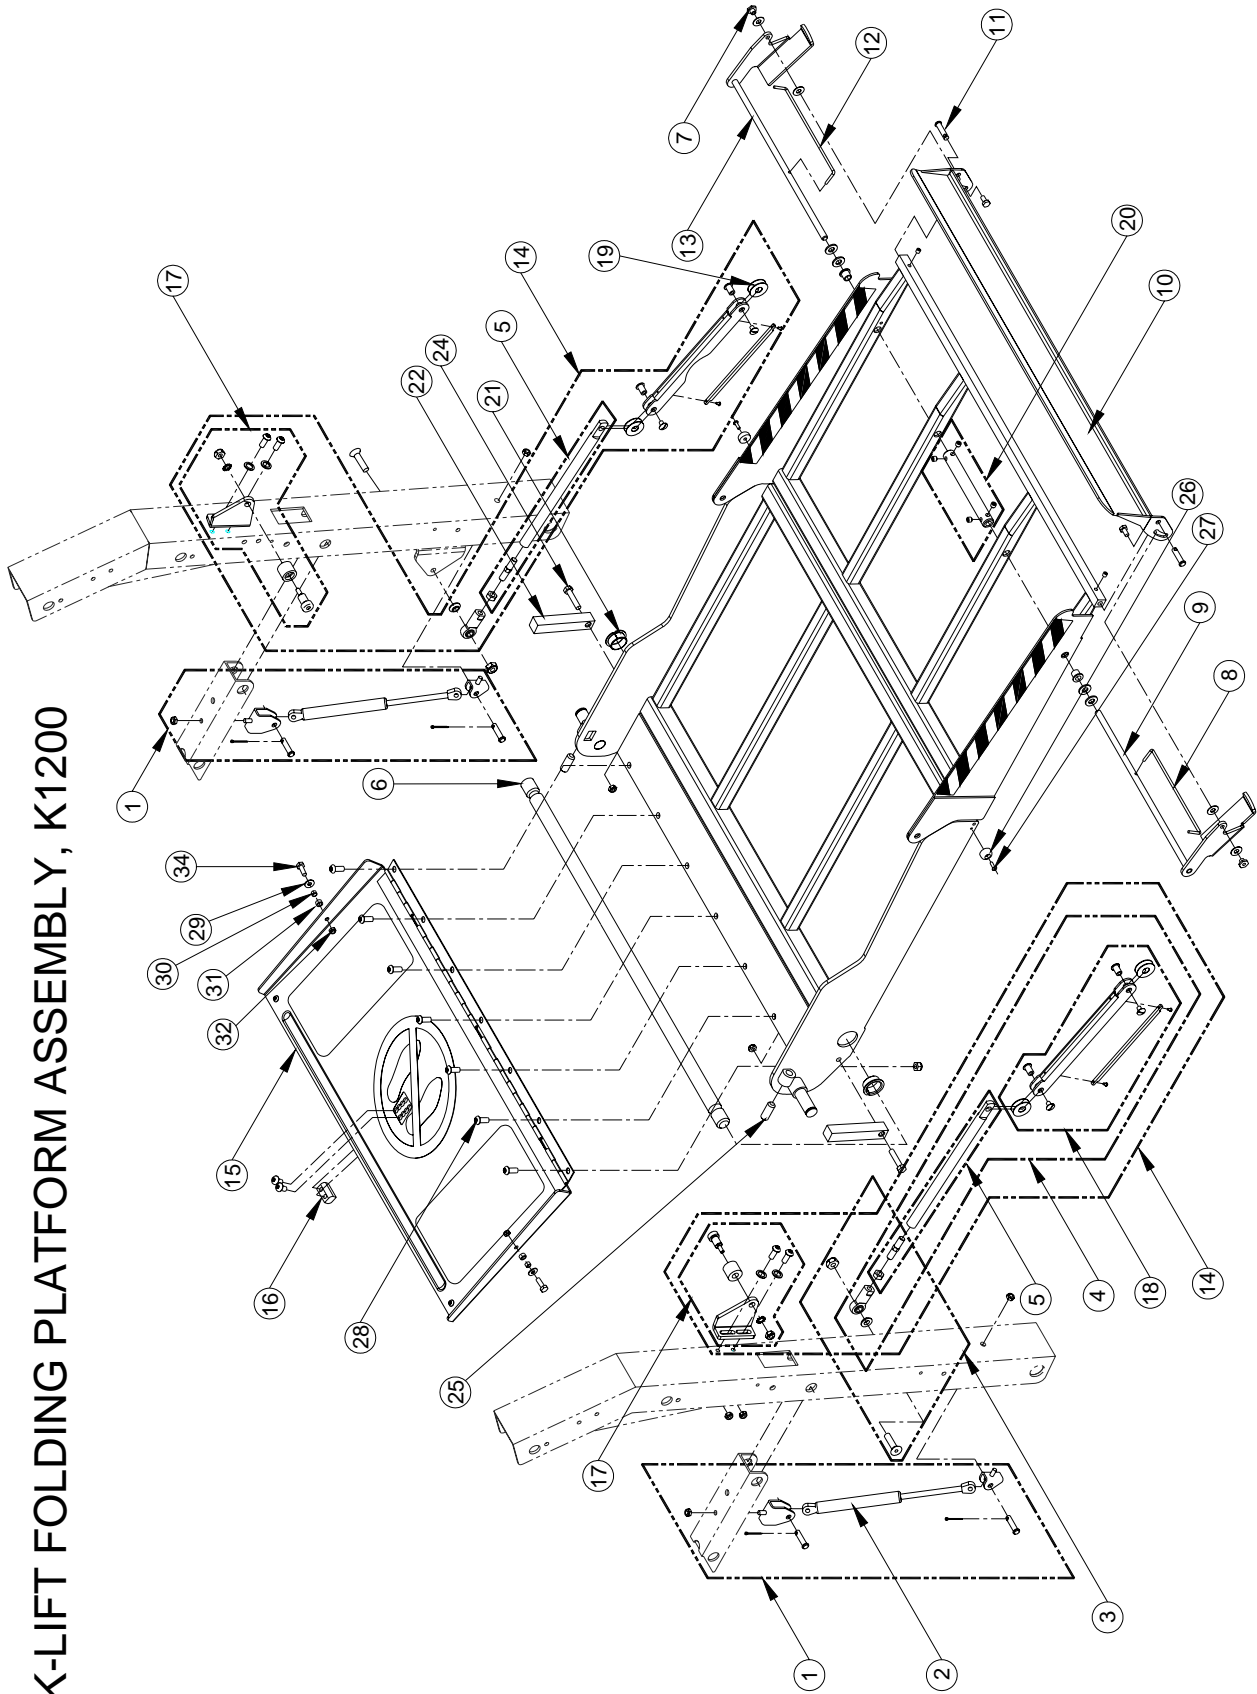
FOLDING PLATFORM ASSEMBLY, K1200
